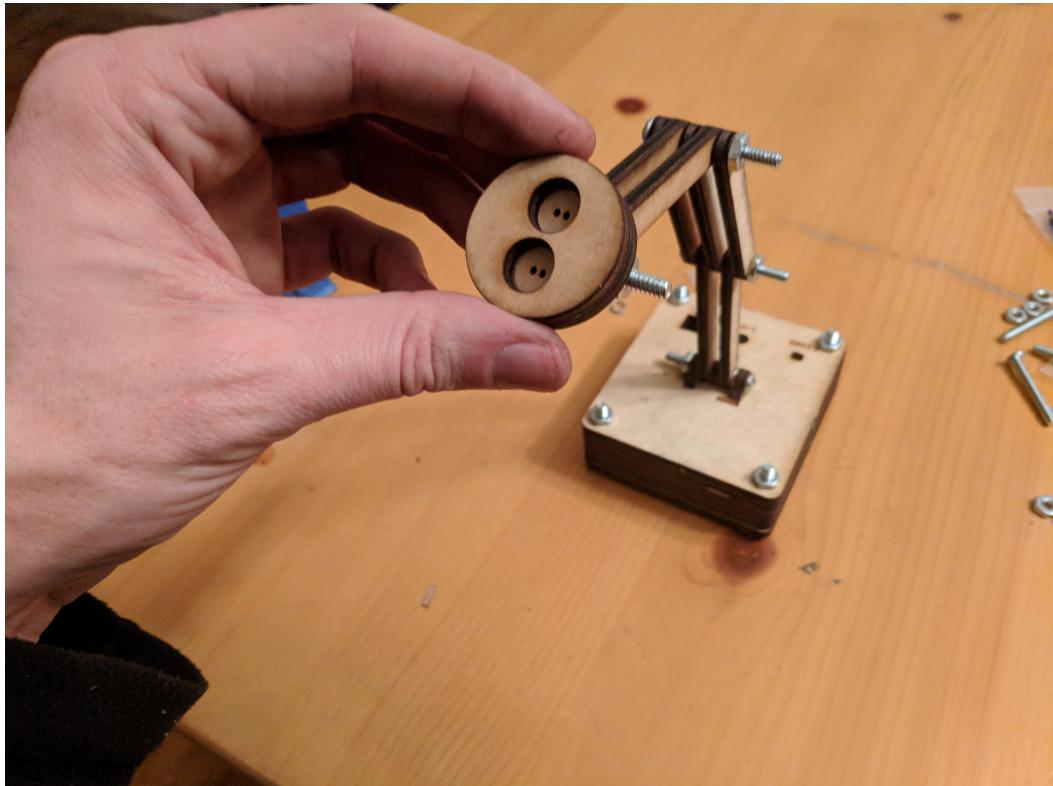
Another view of the lamp being put together - the base is stacked with the solid pieces on the top and bottom
